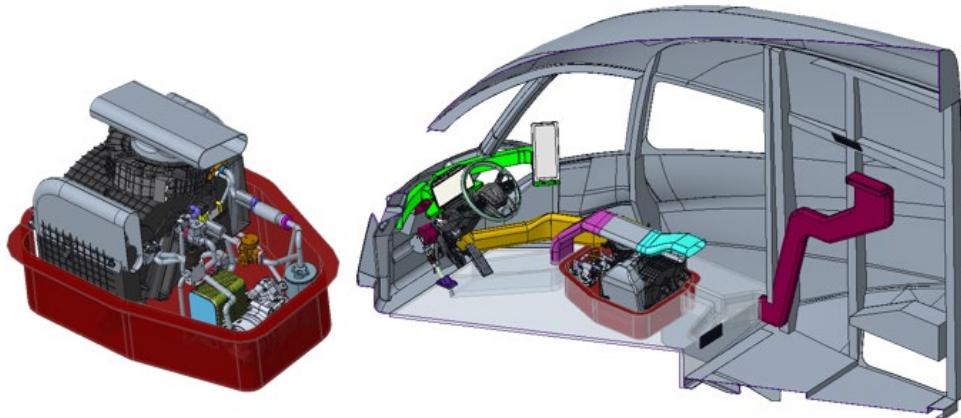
Left: Heat pump assembly, modular and pre-charged. Right: Heat pump assembly within STII demonstrator, including ducting for cab and sleeper.
